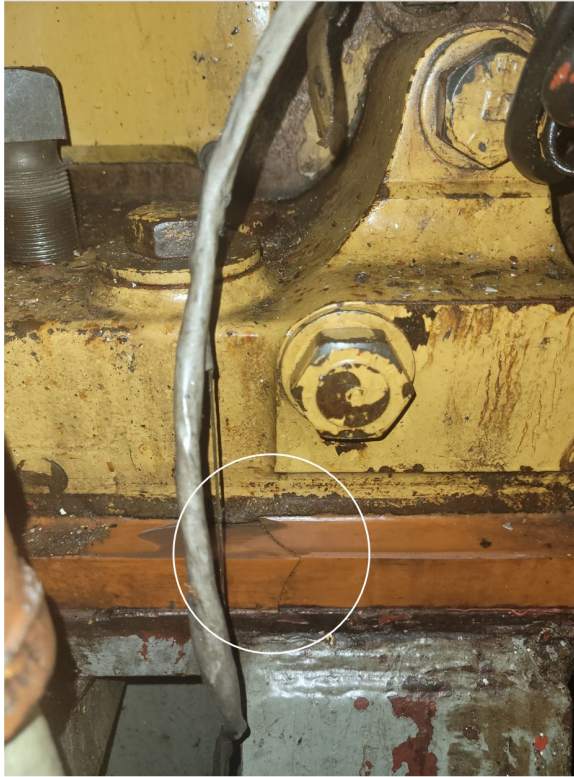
Close-up photo of engine mounting, showing a crack on the aft port engine mount near the bolts (Source: TSB)
